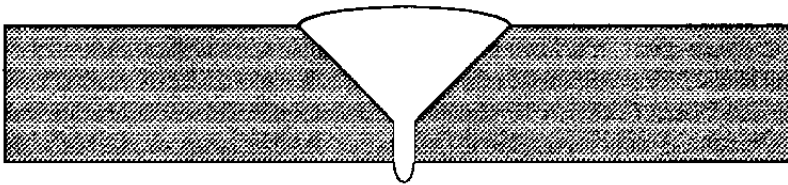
Butt welded Butt joint (Single "V")
